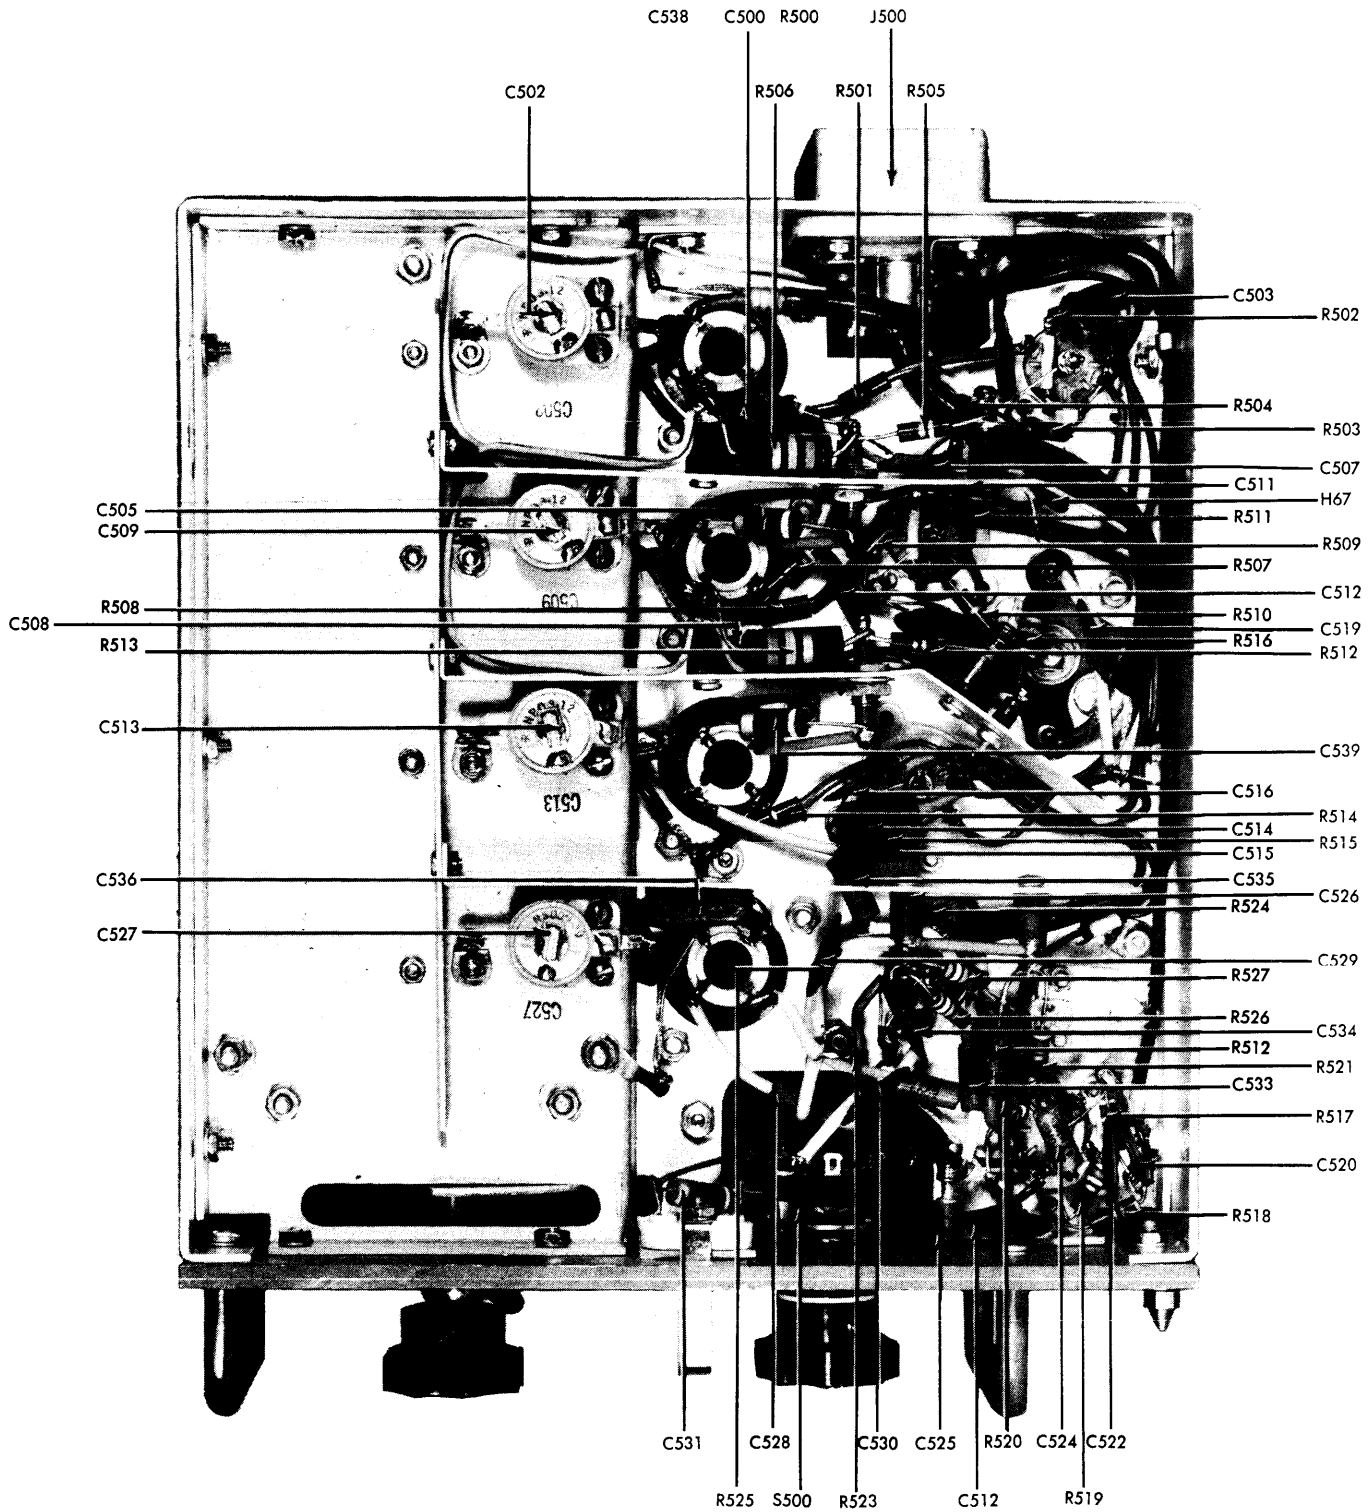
Bottom View (plate removed), TN-5010/FRR-502
